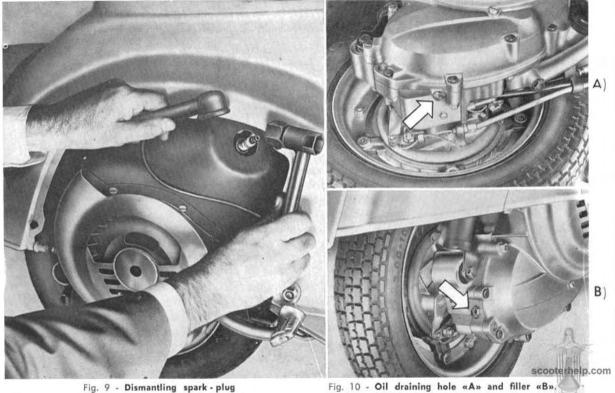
Dismantling spark - plug Fig. 9 - Desmontaje de la bujía
